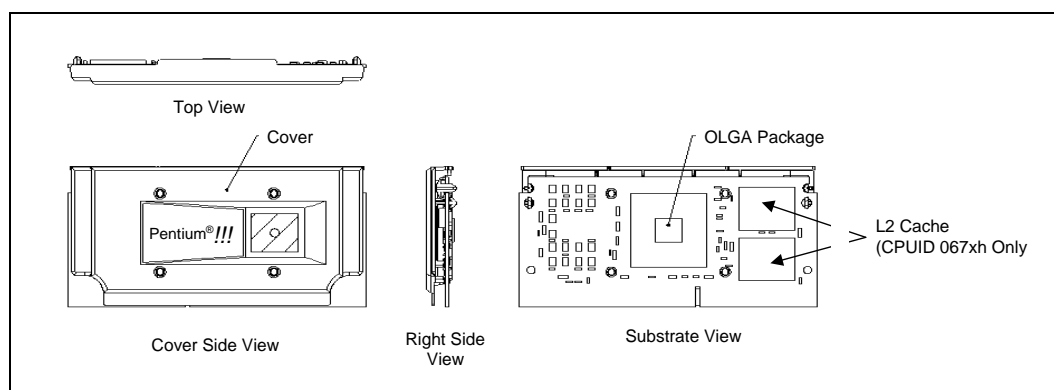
S.E.C.C.2 Packaged Processor Assembly — Primary View
